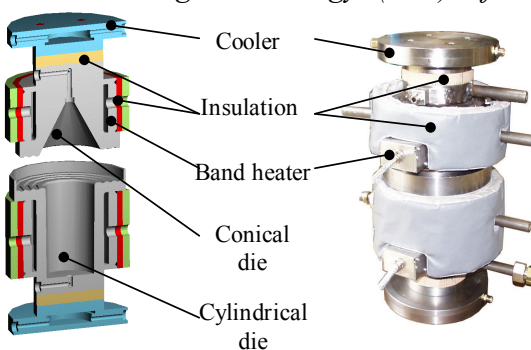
Tooling assembly for superplastic forming die using gas pressure
